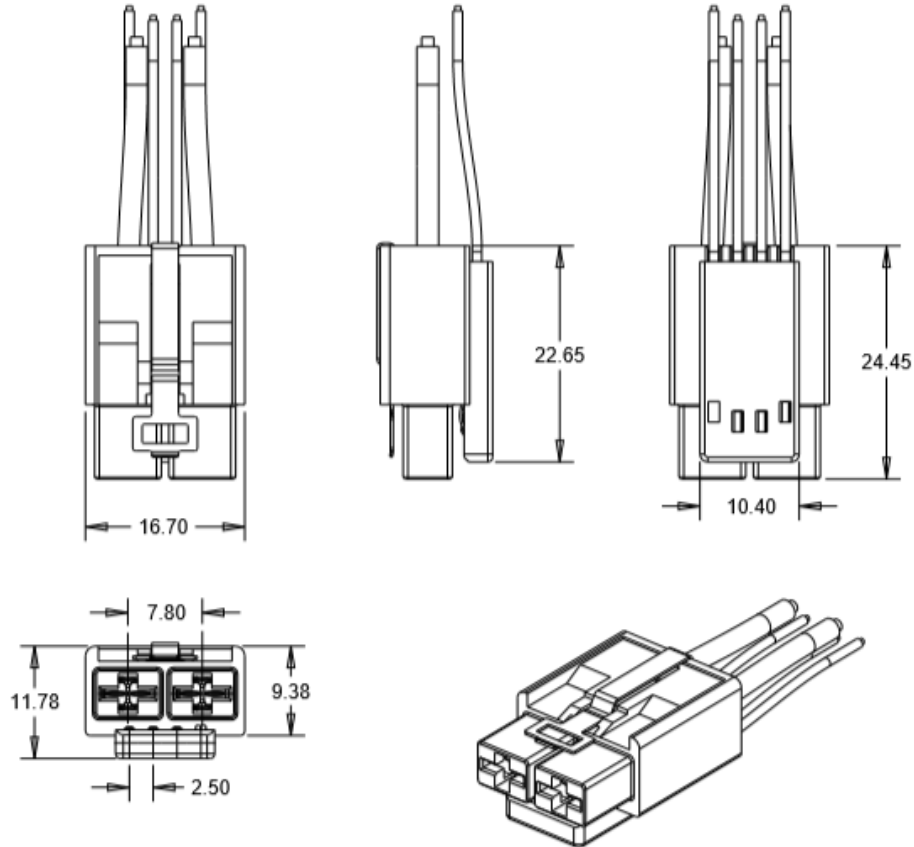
48VHPWR Cable Plug Connector Housing
